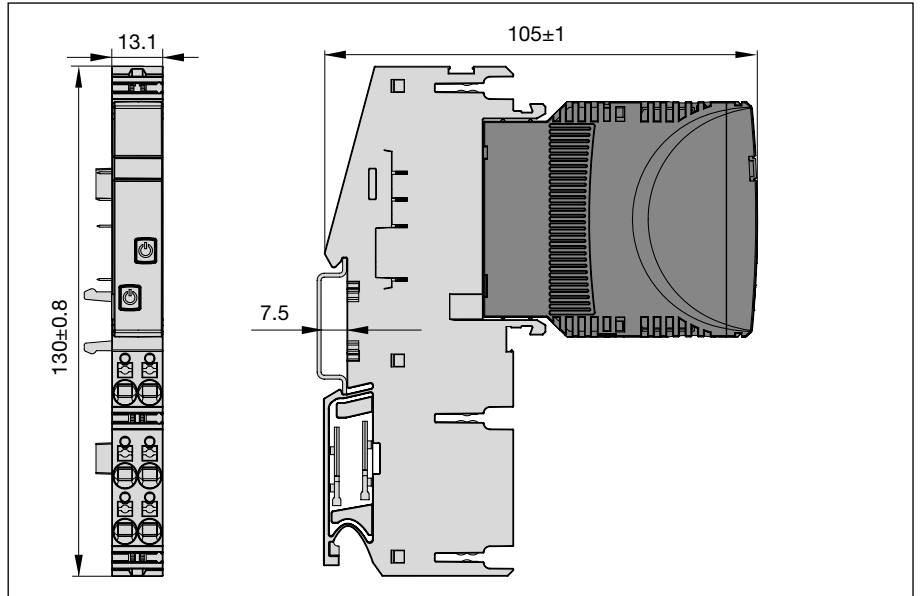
Dimensions of 18plus-AM03 connection module fitted with ESX60D
